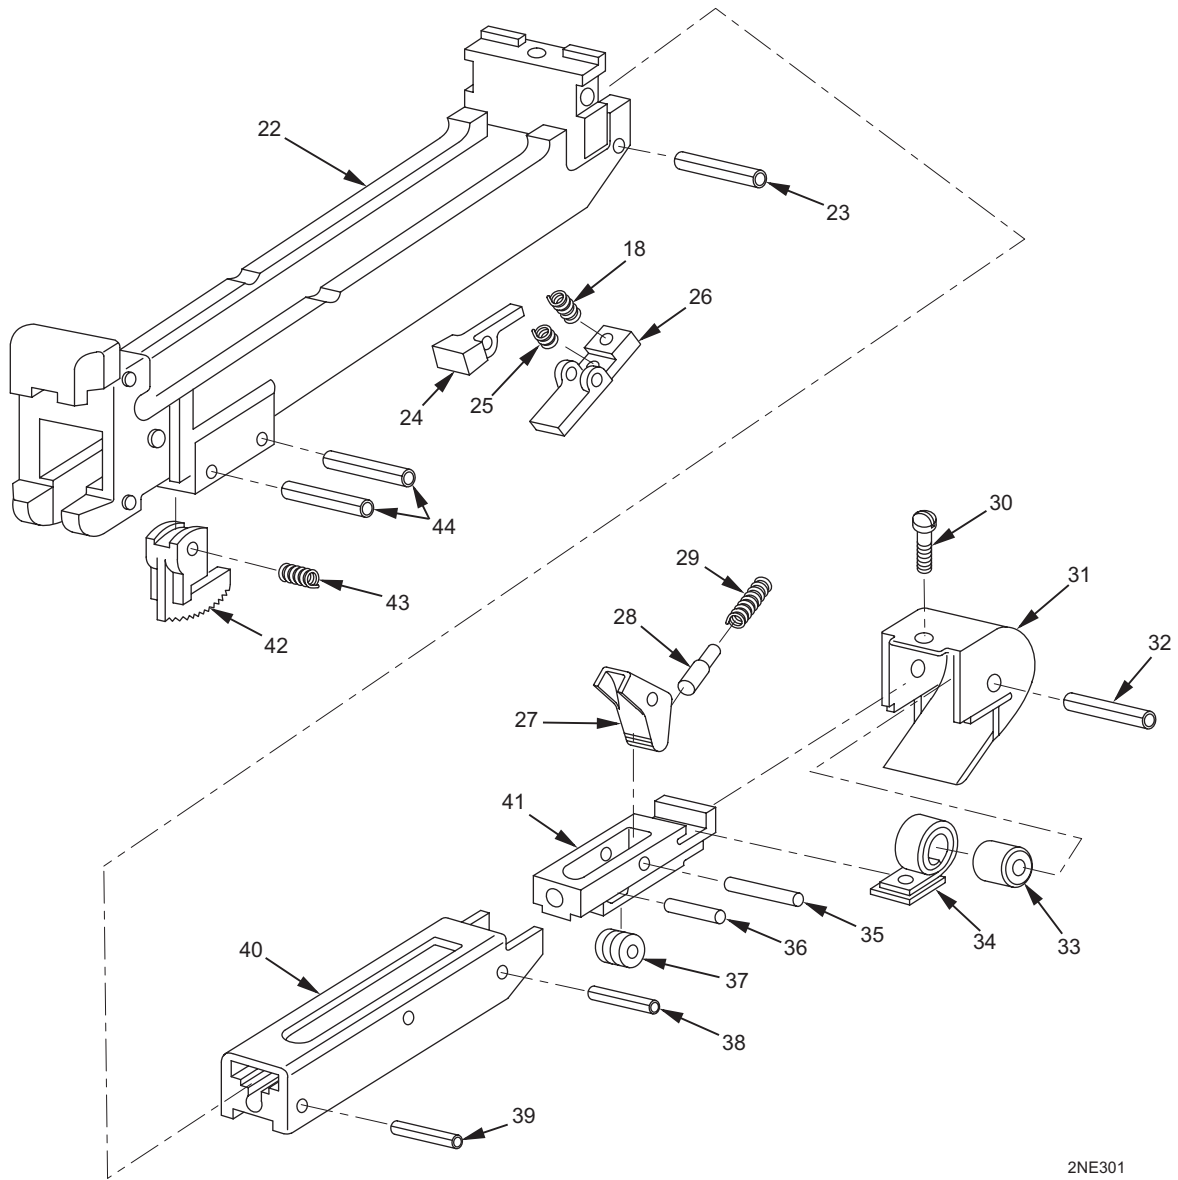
M10 Caliber .50 Gun Charger 7267982, Bolt Charger Stud Assembly 7268490, and Backplate Assembly 12012077 (Sheet 1 of 2).
